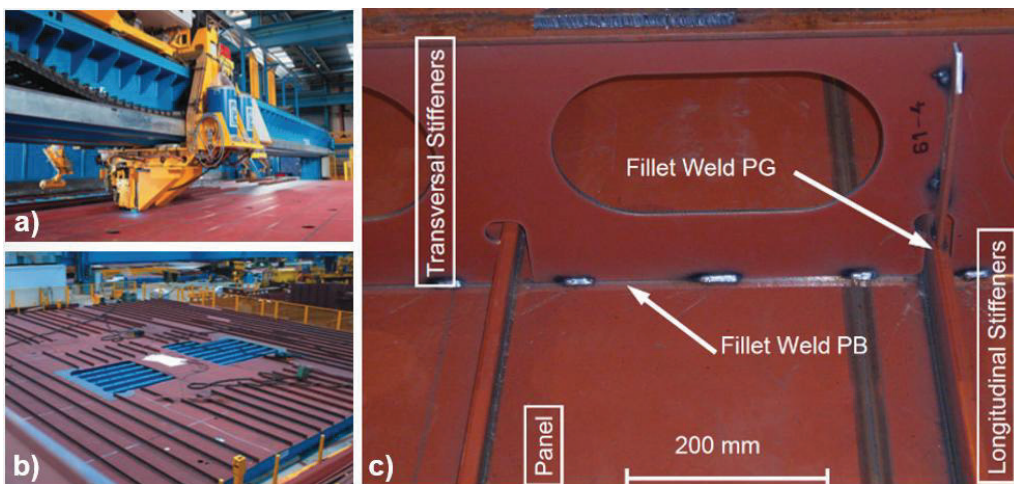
Production of deck panels at Jos. L. Meyer GmbH, Papenburg: a) HLAW setup to weld stiffeners; b) finished panel; c) fillet welds (T-joints) needed for joining stiffeners.
